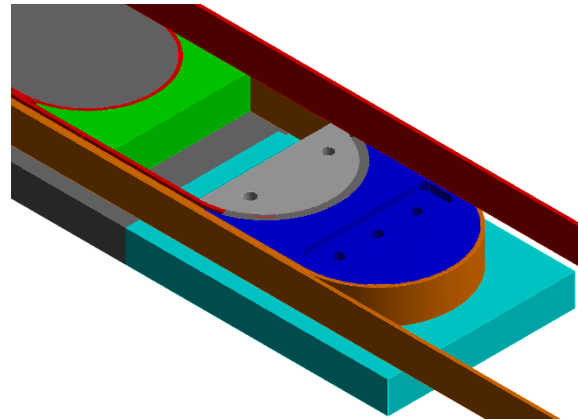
Connecting and threaded plates are disassembled after that the pressing screws are untightened.
